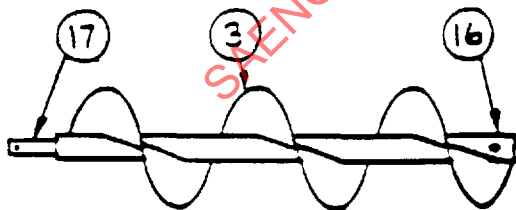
TRACK-TYPE AUGER BORING MACHINE
